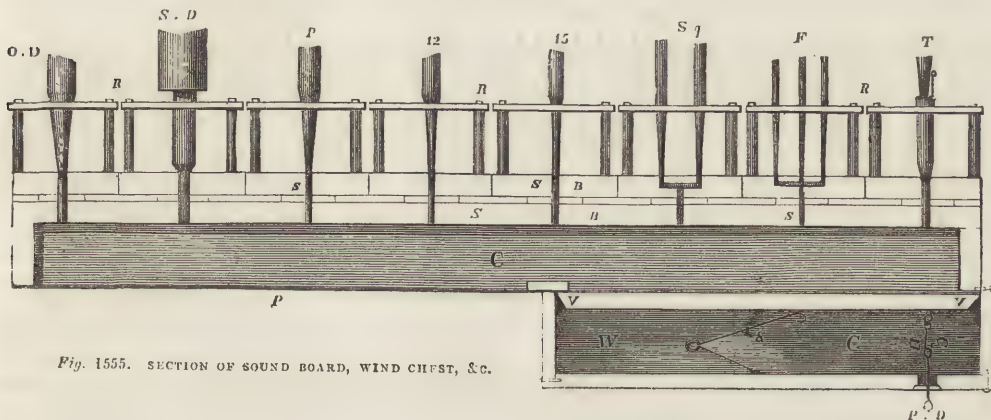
SECTION OF SOUND BOARD, WIND CHEST, &c.
